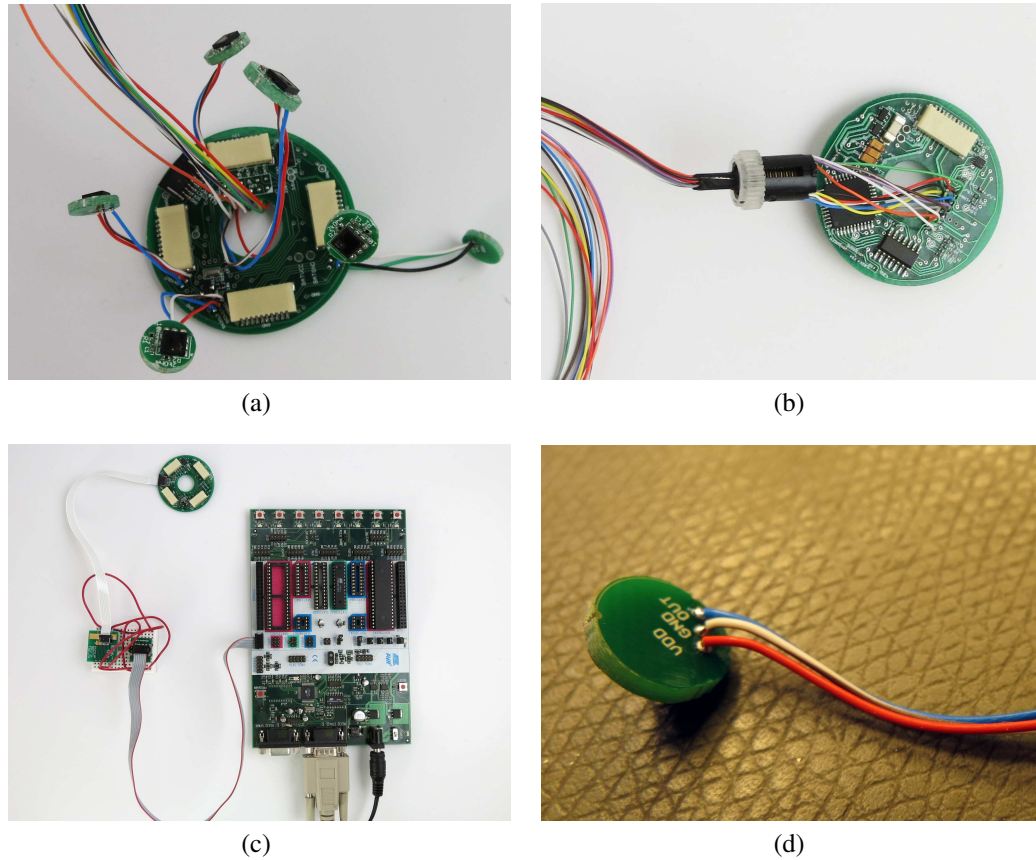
Main controller PCB and adjacency sensor PCB. (a) Main controller PCB with six adjacency sensor breakout boards and 12 connection wires to the slip ring. (b) Main controller PCB with slip ring. (c) ISP programming the main PCB using a development board and custom adapter. (d) Adjacency sensor PCB with soldered connection wires.
